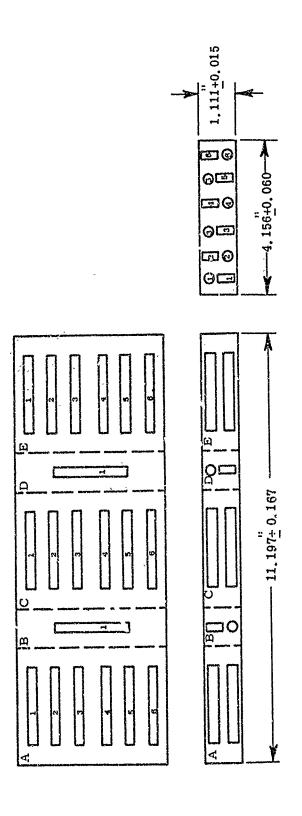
Cutting Plan - Specimen Blank 3A10-088
